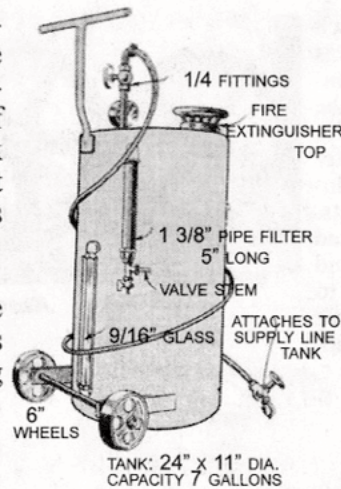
High pressure bleeding and testing tank. The tank can also be used for pressure flushing with alcohol to remove pipe line sediment. It is faster than gravity feed system shown in Fig. L7.
